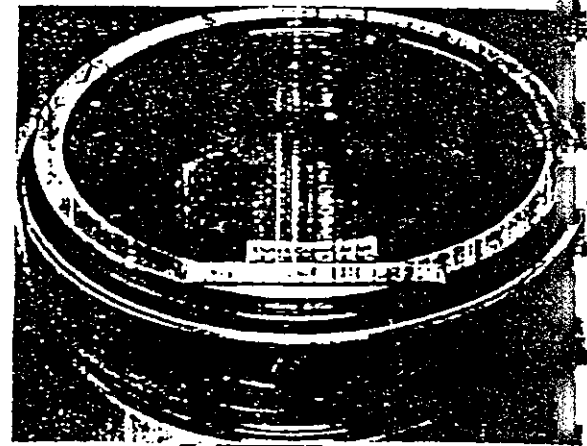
Jet engine casing, with integral "vane ends" and pockets produced by ECM. The process is used extensively to produce this type of component in the gas turbine industry. (Courtesy of the Aero Engine Division, Rolls-Royce Limited.)
